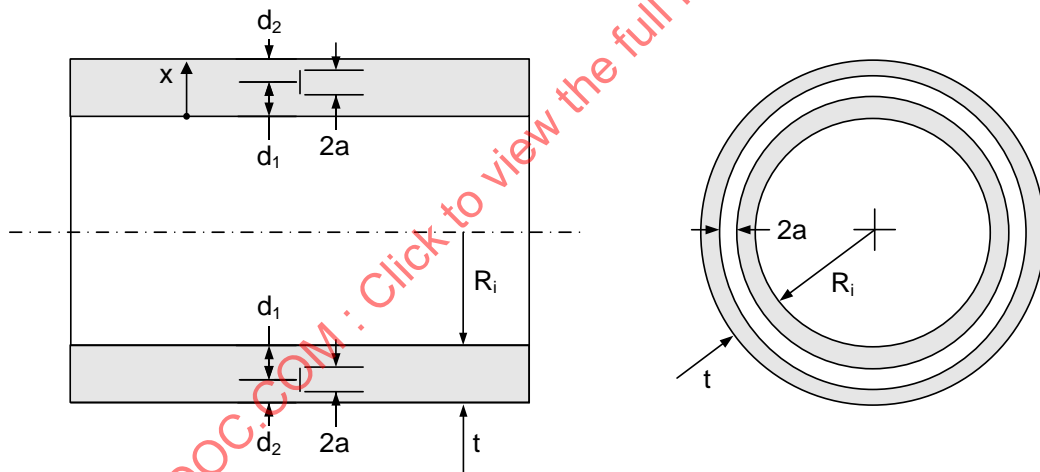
B.18 – Cylinder – Embedded Crack, Circumferential Direction – 360 Degrees
